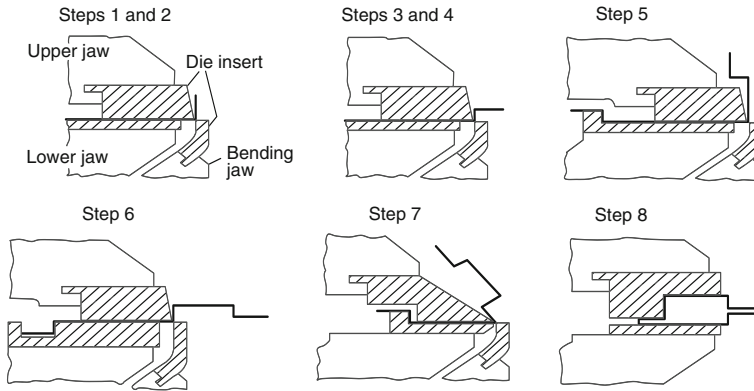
Manufacture of a door frame profile (folding) [OEHL63]
